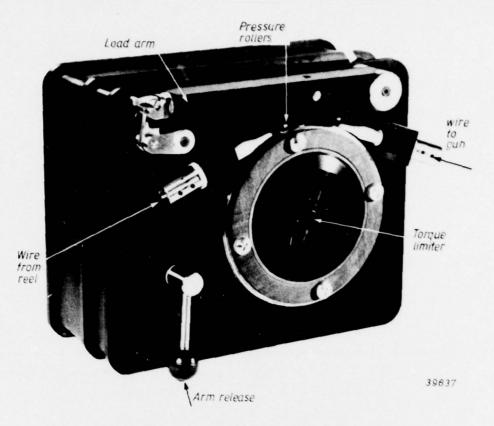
Multigrip wire feeder with 150mm diameter drive wheel, half full size.
